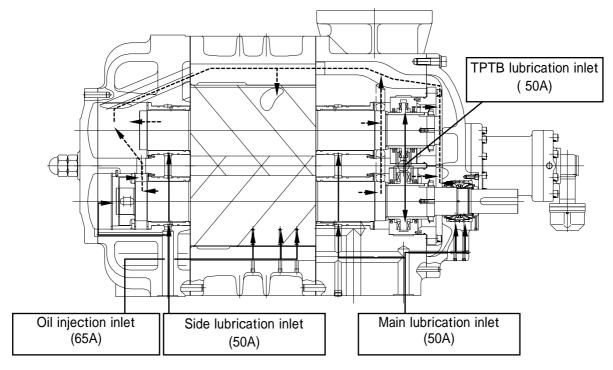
Lubricating Oil Flow, Inside of Compressor
